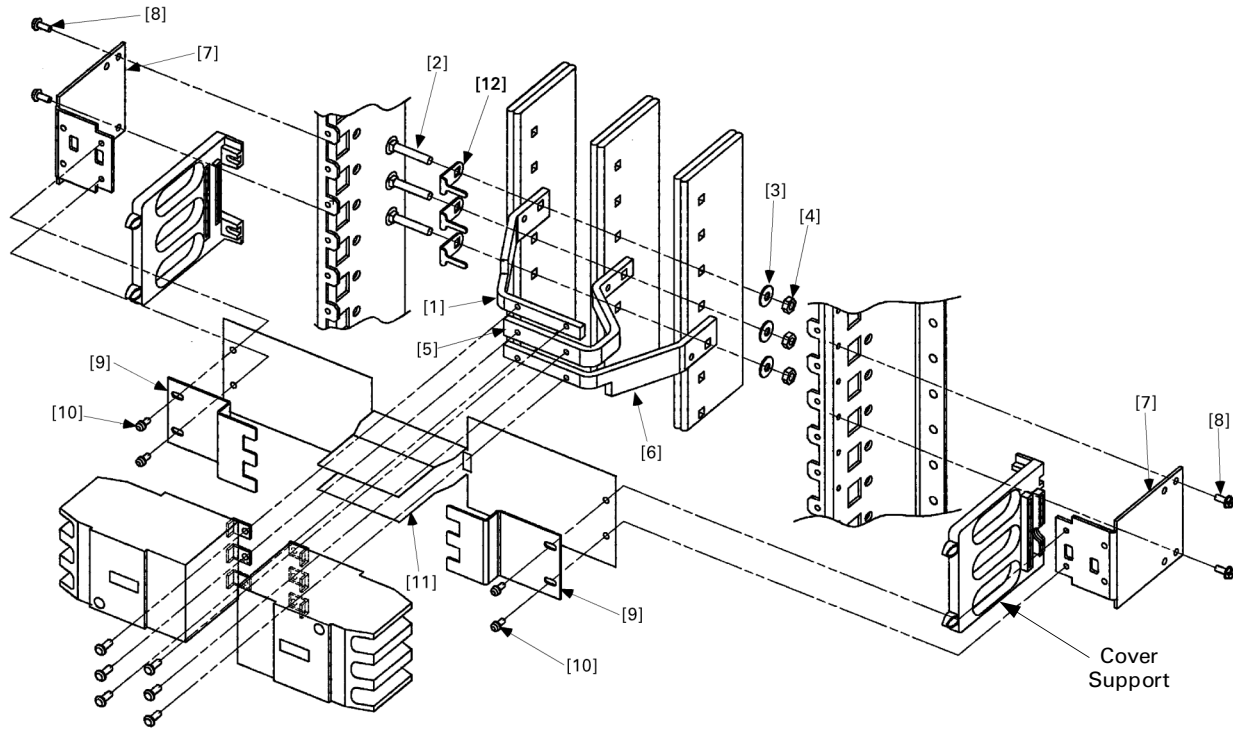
Mounting TEY circuit breakers into Spectra APNB bolt-on interiors.
